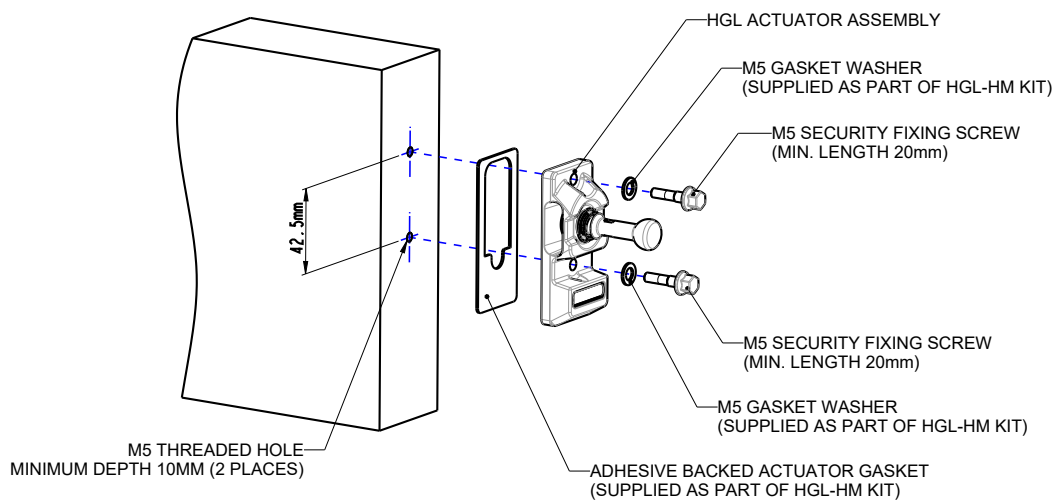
Switch Mounting using HGL-HM mounting kit and M5 threaded holes
